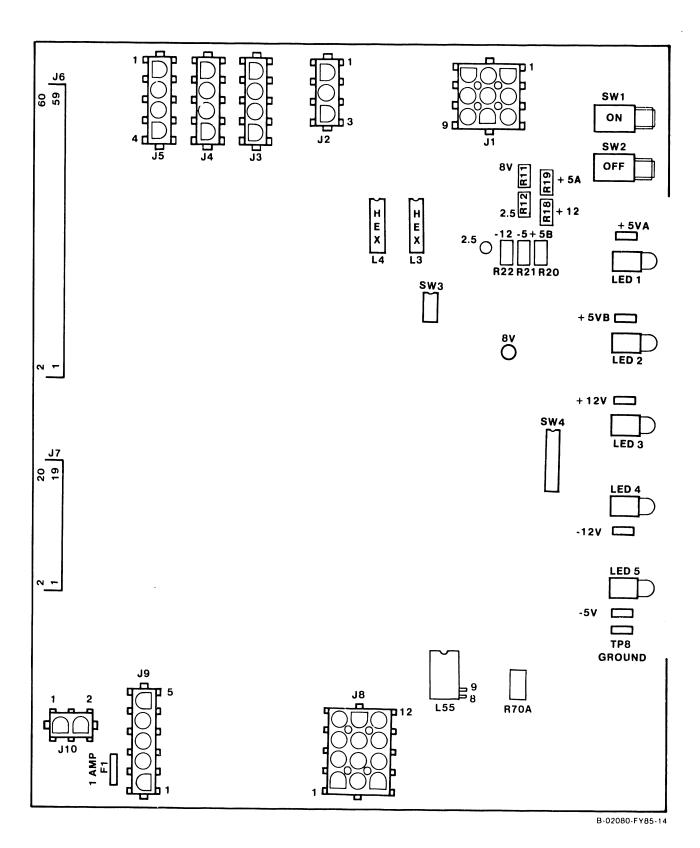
Power Supply Controller Board. (Rev. 0 Version)
